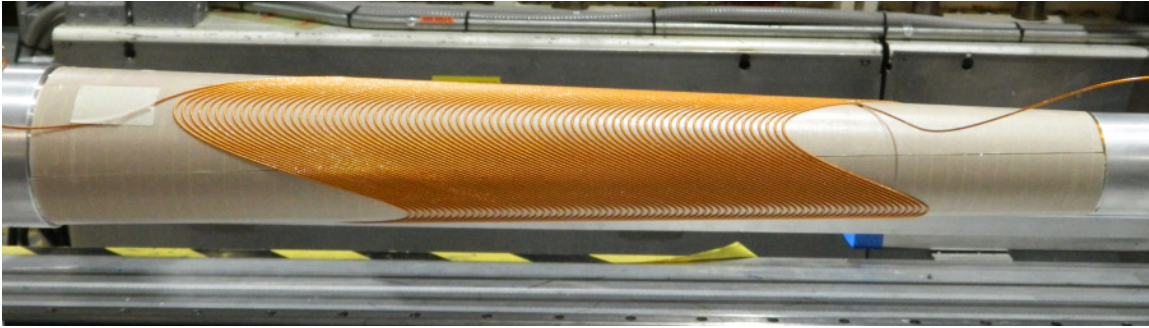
Tapered double-helix coil demonstrator, completed first layer.
